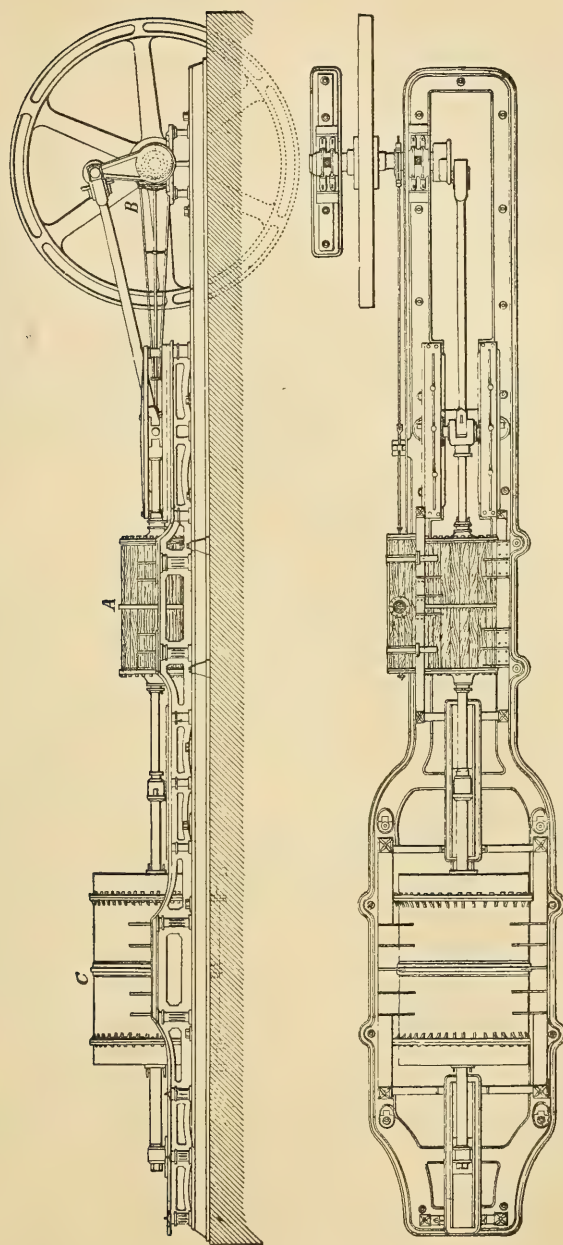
Horizontal Blowing Engine. A, Steam cylinder. B, Crank shaft. C, Blowing cylinder.
